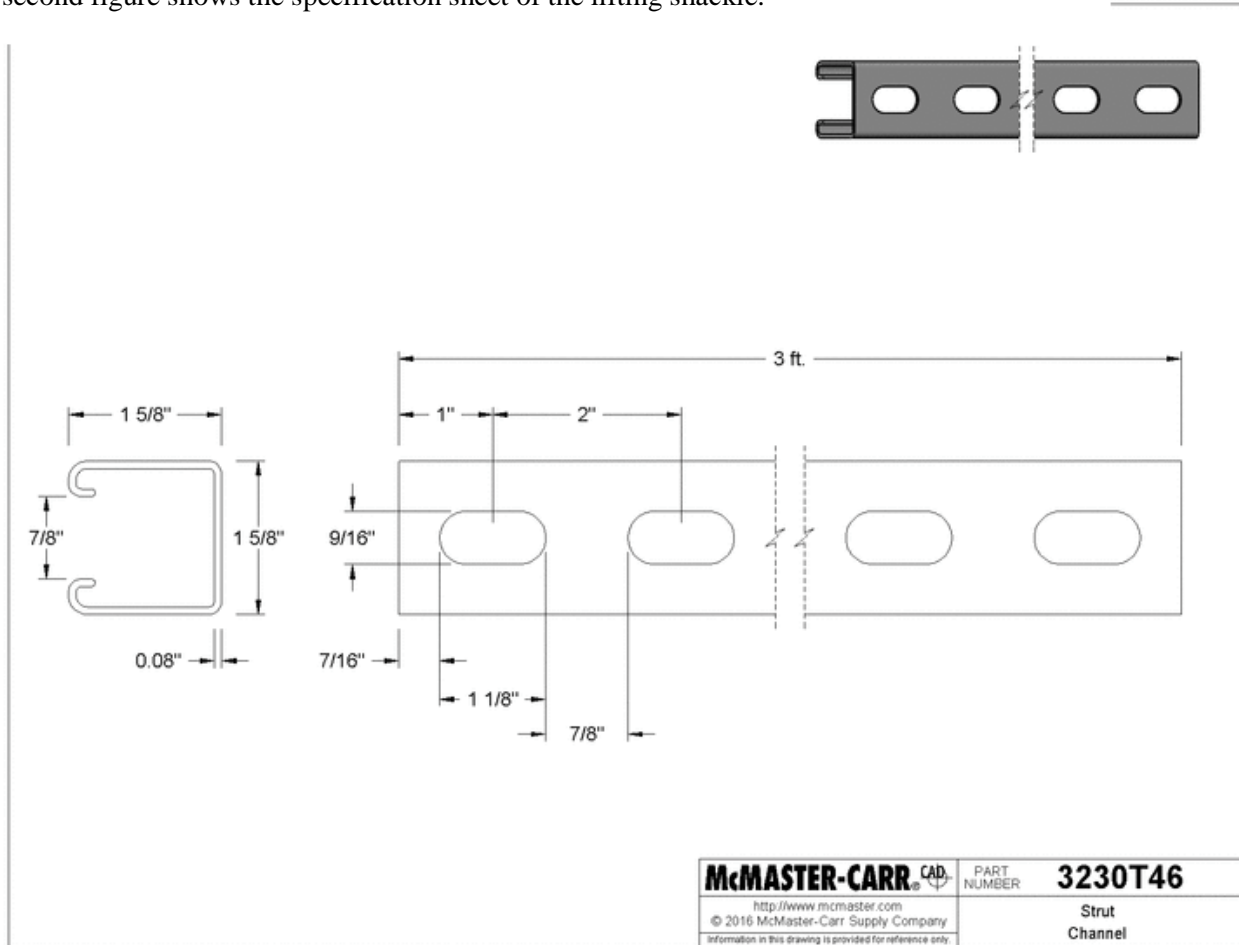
CAD drawing of the unistrut used for mounting equipment to the frame
